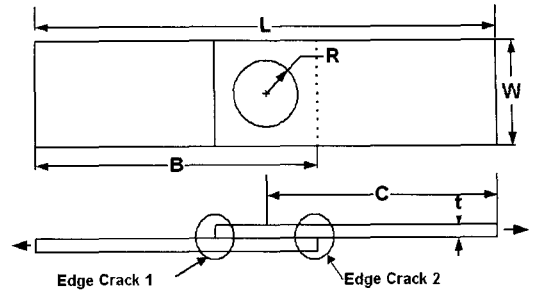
Dimension of specimen of shear-lap model for the fracture analysis
